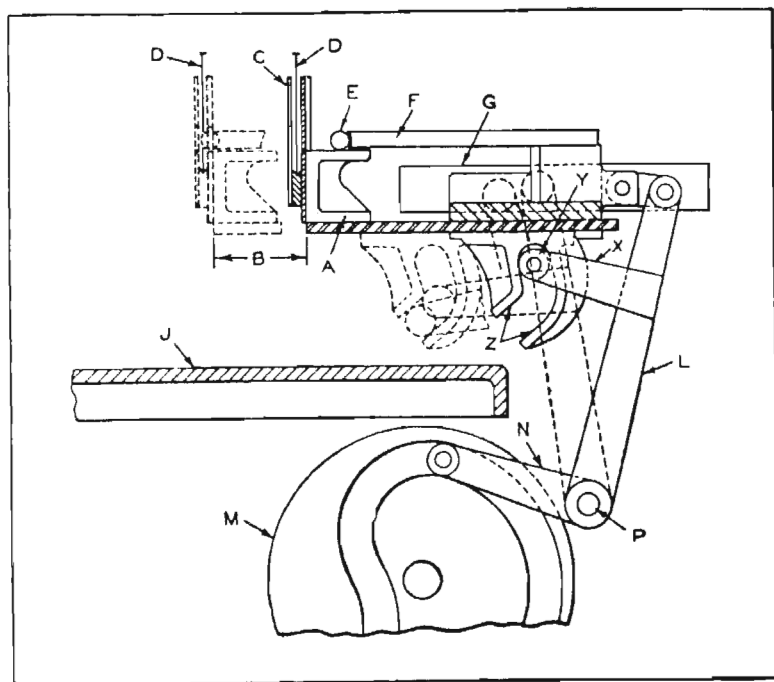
Mechanism Shown in Fig. 4 Redesigned to Give Smoother Action.
